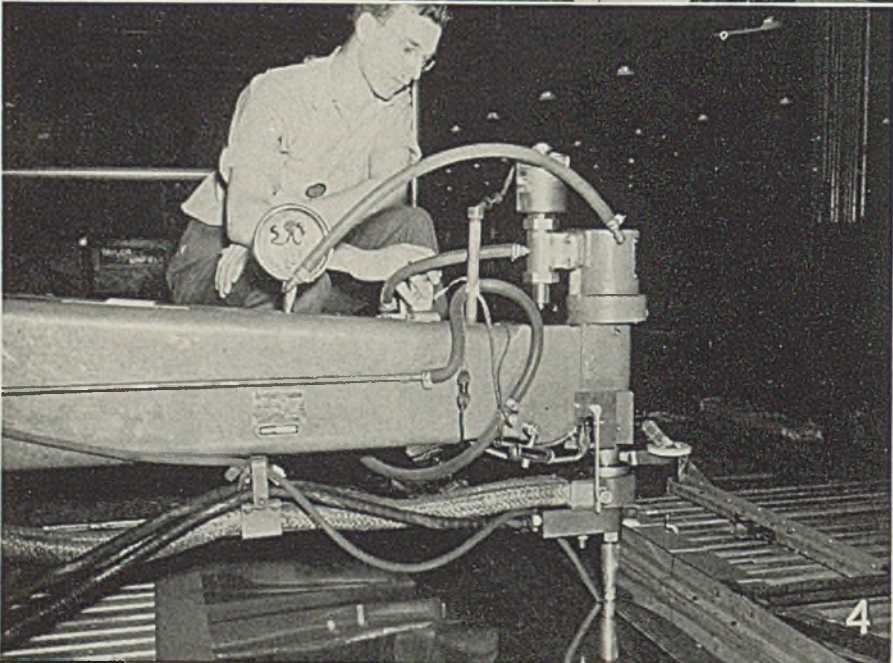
Closeup of Sciaky automatic spot welder used to join or stitch large sheets of aluminum alloy. Traveling carriage moves at predetermined speeds as the welding terminal spots the metal sheets together
